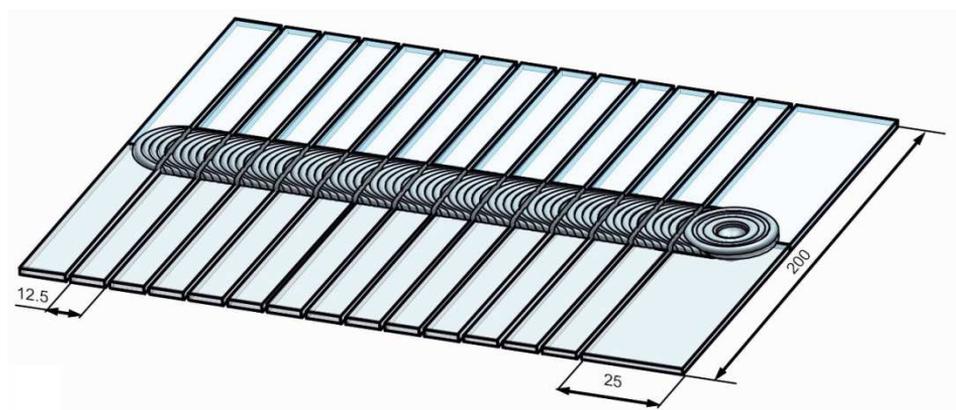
Geometry of specimens for uniaxial tensile testing (dimension are in mm)
